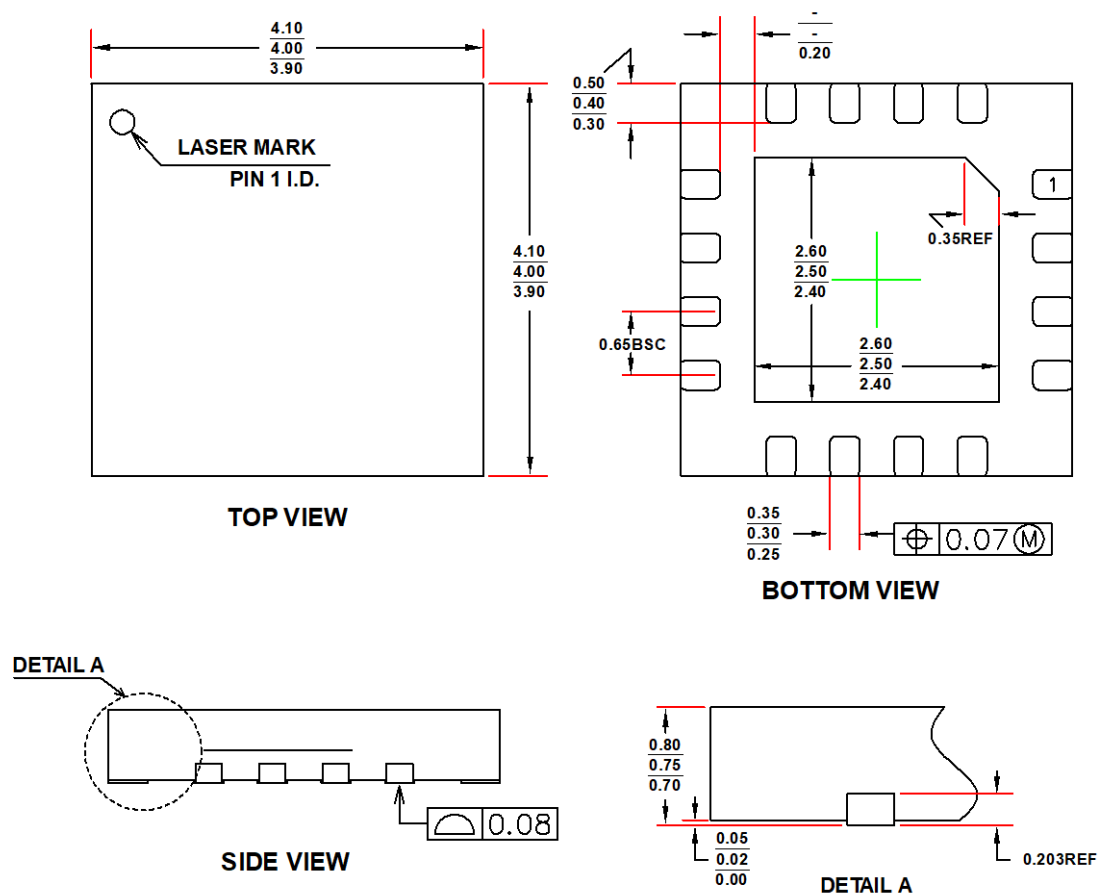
16-Lead QFN Package Dimensions Shown in Millimeters
